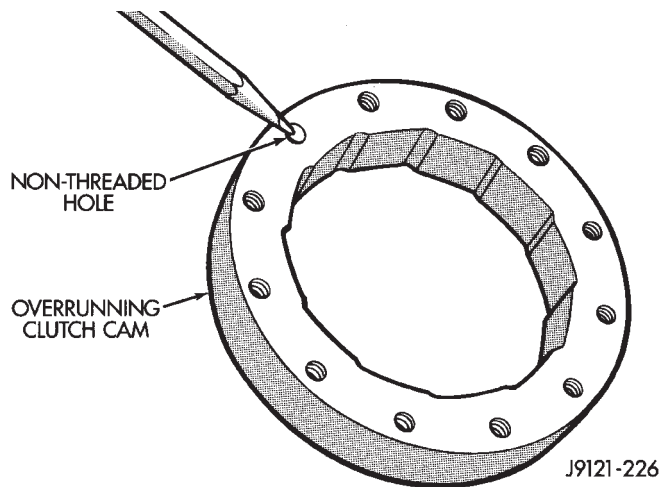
Location Of Non-Threaded Hole In Clutch Cam
